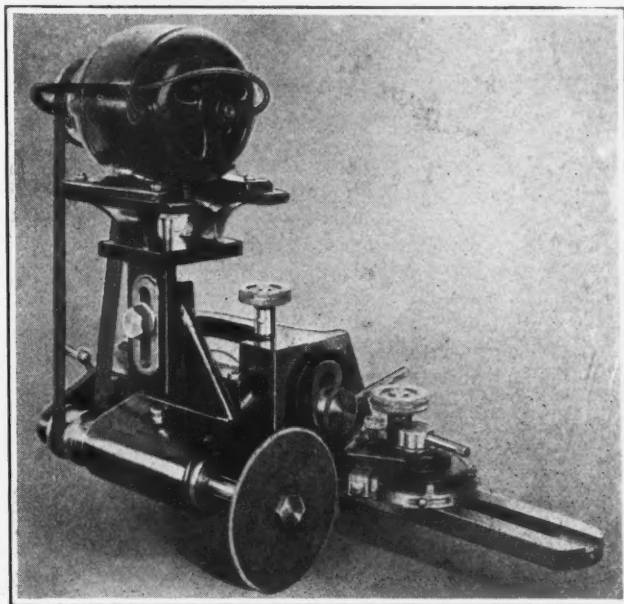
Universal Grinding Machine built by the Lafayette Tool & Equipment Co.
